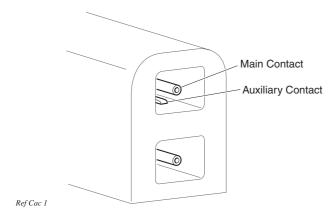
Cleaning Auxillary Contact in Charger Plug
